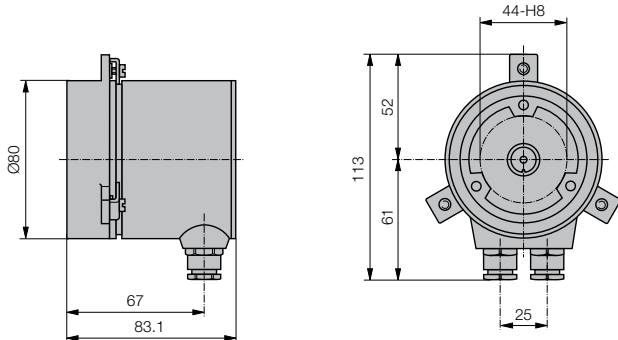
Basic unit for fitting to measuring instruments with revolving indicator shaft. The measuring instrument must have an extended indicator shaft at the back (1.5 mm dia., length 6 ... 7 mm)
